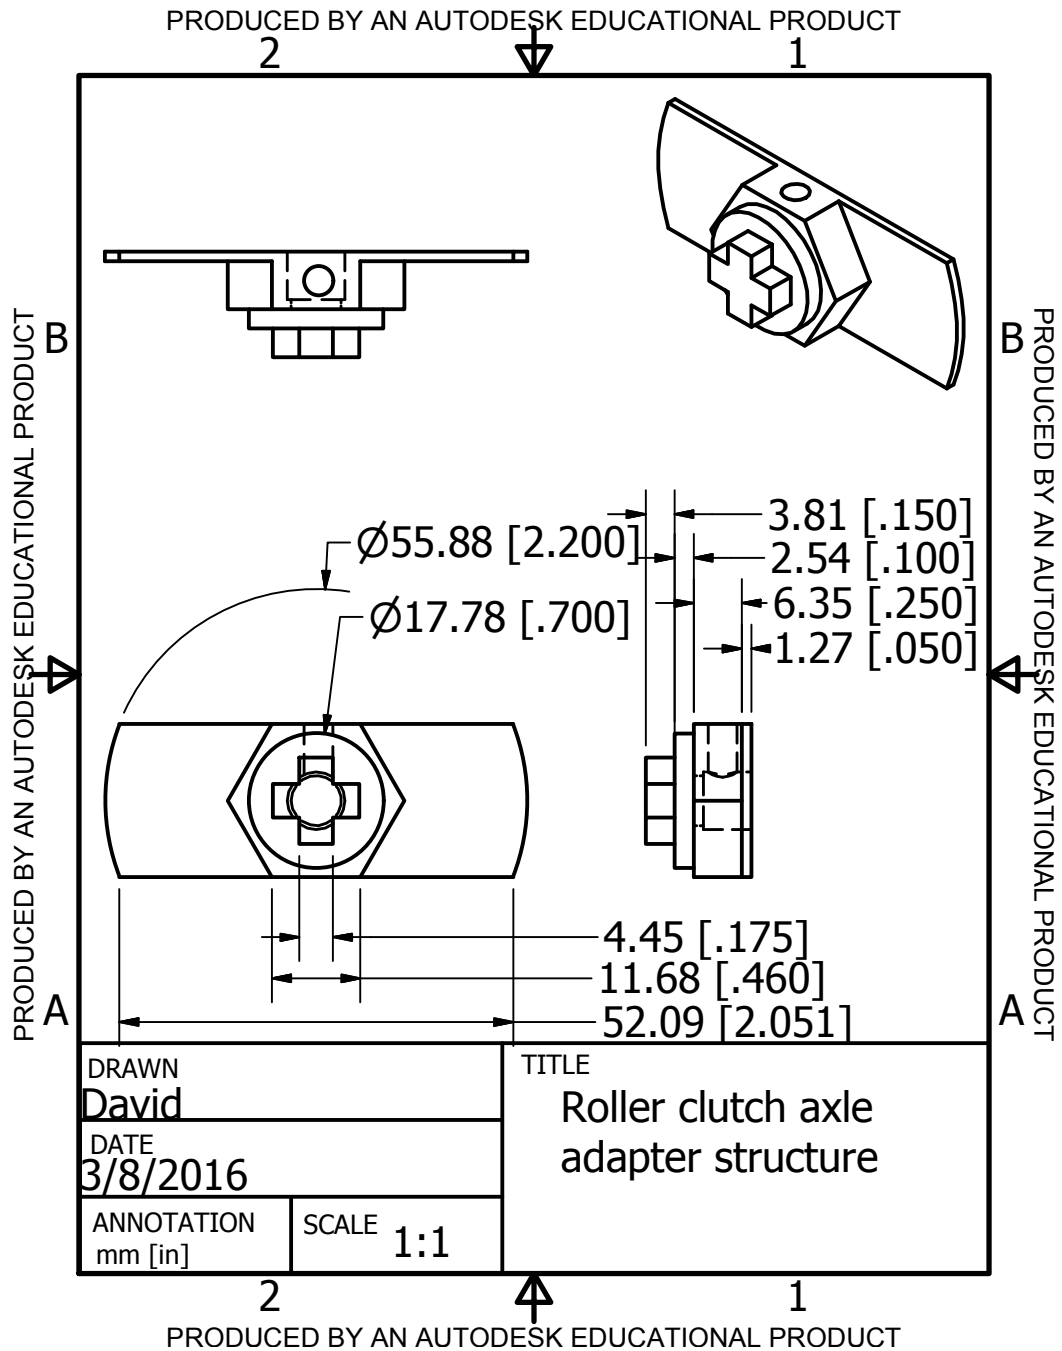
Mechanical drawing for the axle adapter. This piece secures an axle to blind mounting bracket. This provides a central axis for the blind to rotate around and forces the rotor of the motor to be stationary so the stator rotates.
